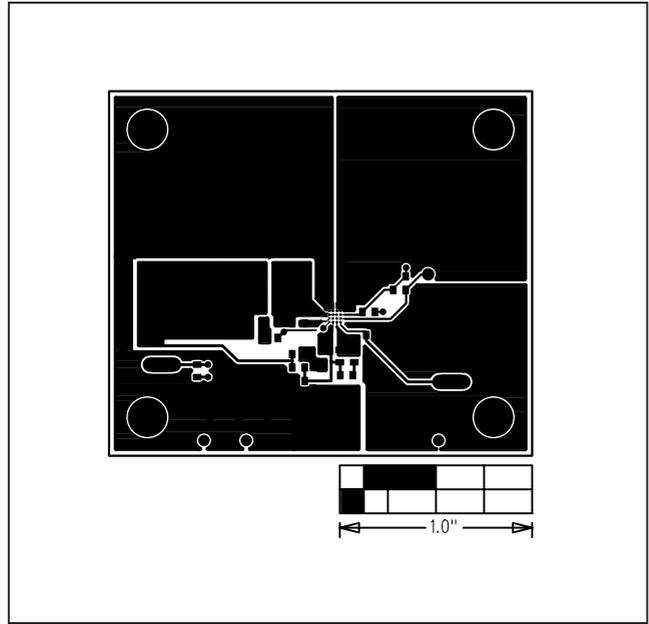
MAX15040 EV Kit Component PCB Layout—Component Side
